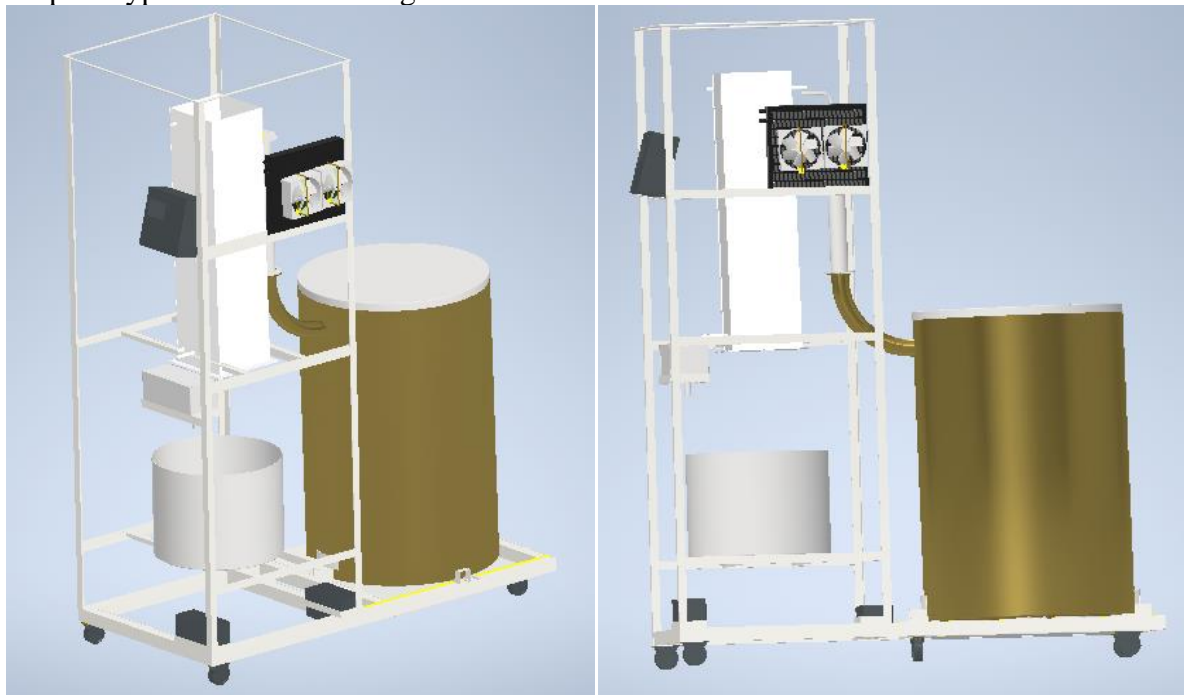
The technical model of the product design; (Left): Isometric view, (Right): Right
